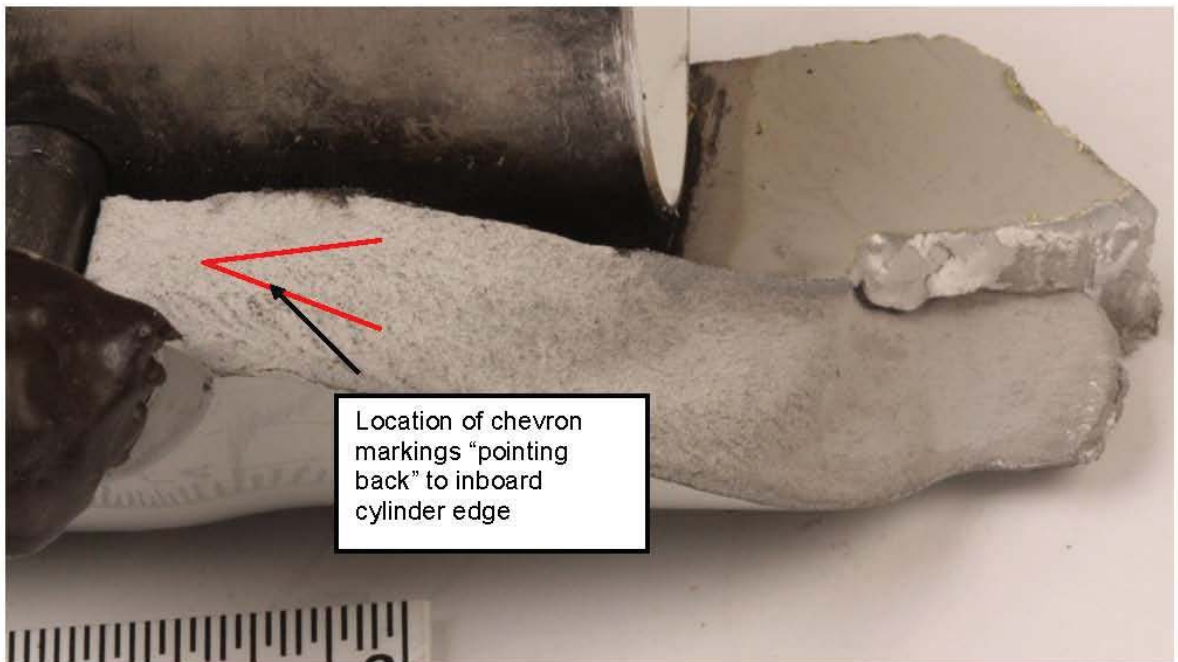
Showing fracture surface 'A1' in detail.
